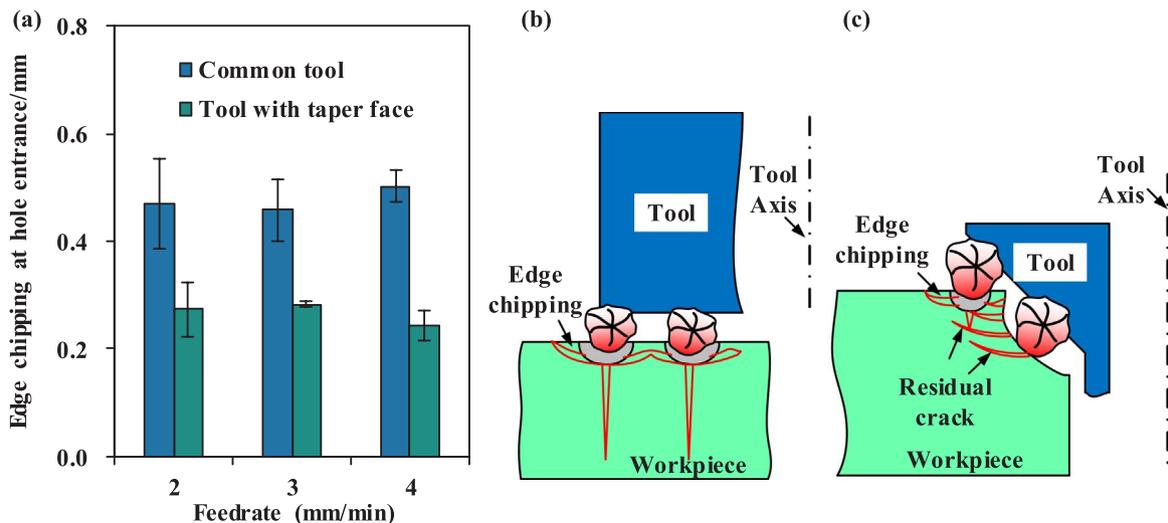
Edge chipping size at hole entrance [68]. (a) performance of tool with taper face, (b) mechanism of edge chipping reduction at hole entrance.
